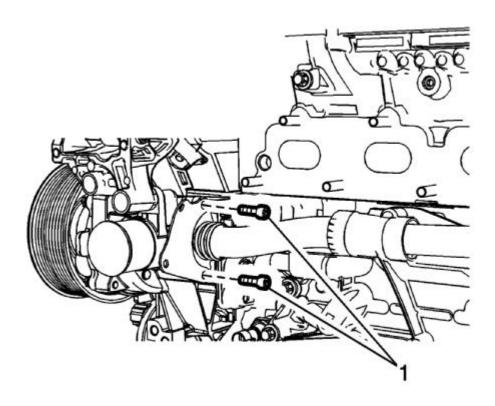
Engine Oil Cooler Outlet Pipe Bolt Courtesy of GENERAL MOTORS COMPANY
